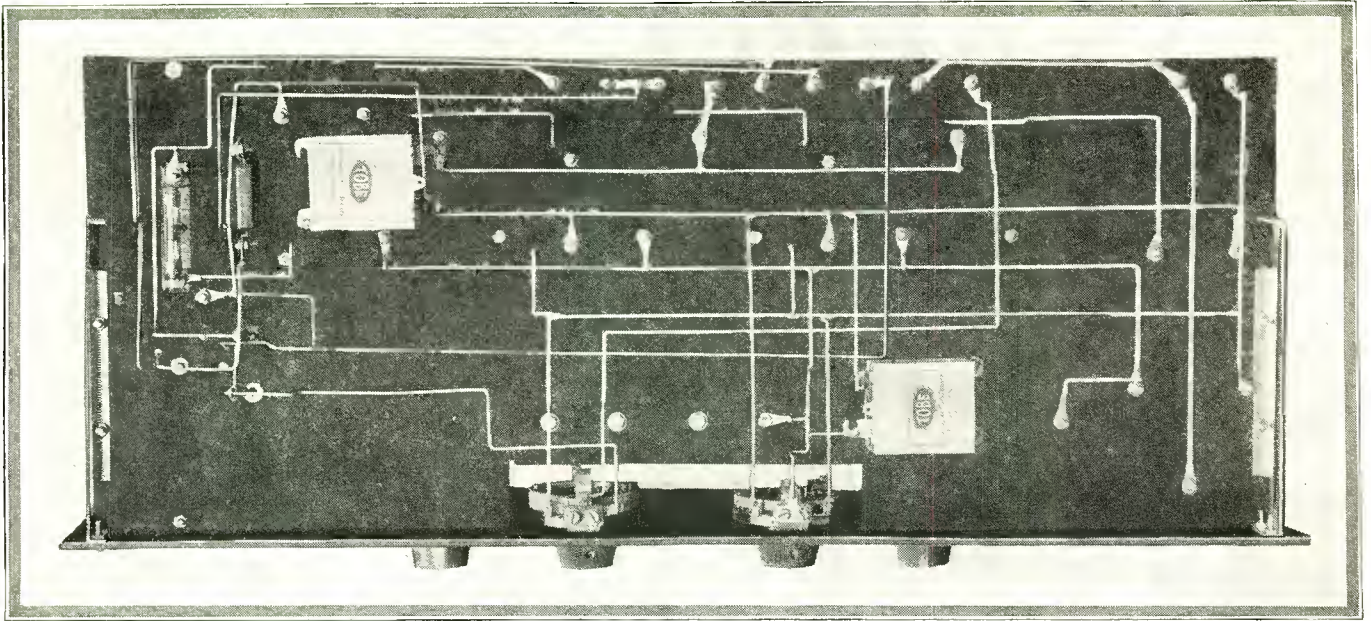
Here is shown photographically the bottom view of the set, with its simple wiring
